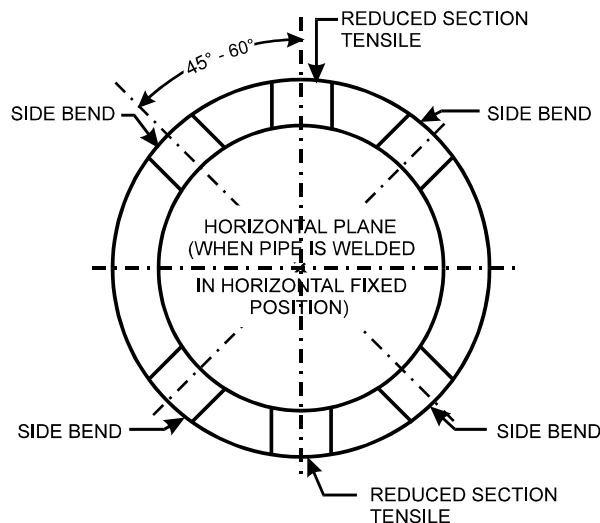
Location of Test Specimens for Job Size Pipe or Tubing Over 3/8 in. Wall Thickness (see 5.17.4.3)
